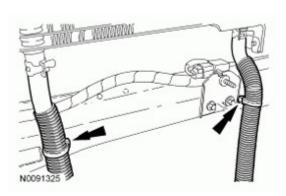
Locating Pin-Type Retainers And Air Deflectors Courtesy of FORD MOTOR CO.
